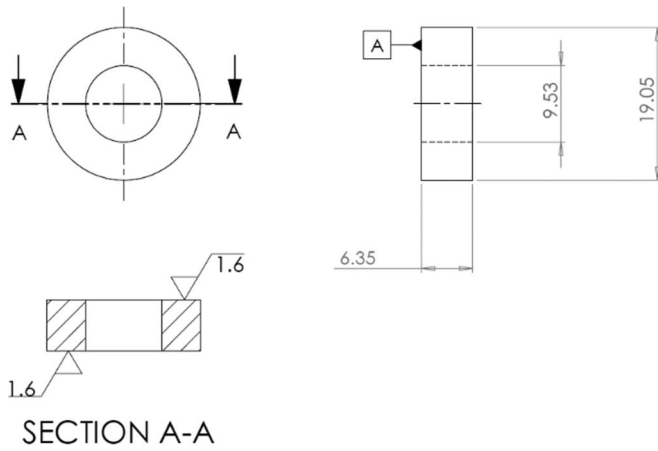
Ring compression test specimen drawing. All dimensions in mm and surface roughness (R_a) in μm .
